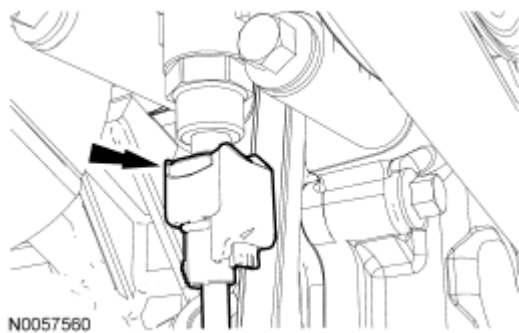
Identifying Power Steering Pressure (PSP) Switch Electrical Connector
